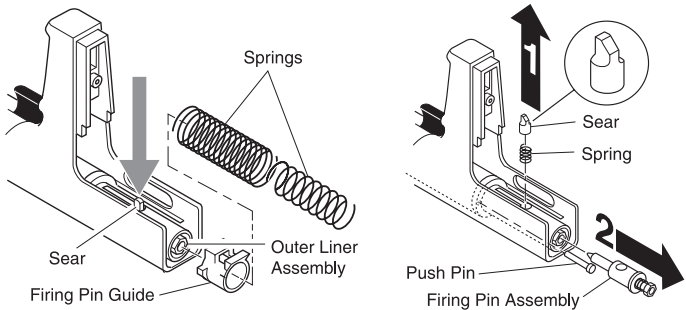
Removing Springs and Pushing in Sear to Remove Firing Pin Guide
